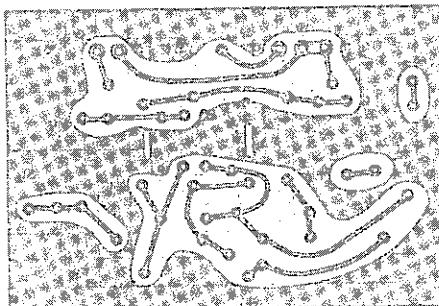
PRINTED CIRCUIT BOARD (Foil Side)
